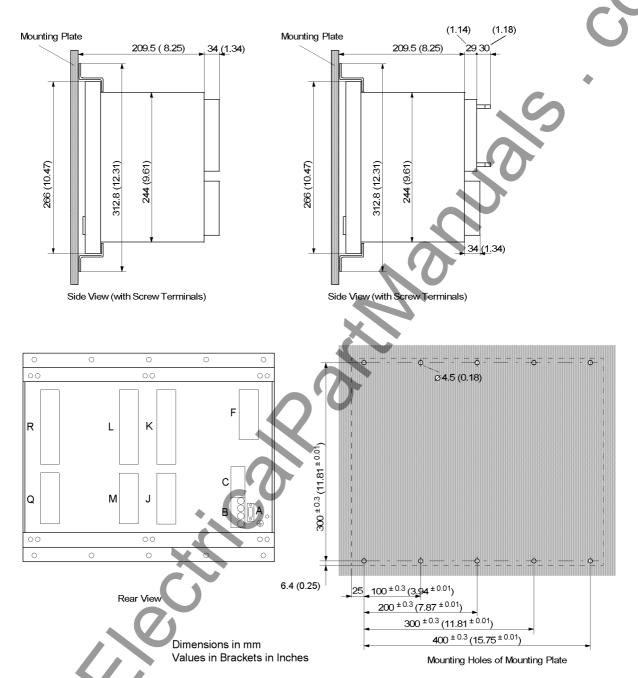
Dimensions of a 6MD63 for panel surface mounting with detached operator panel or without operator panel (housing size 1/1)
